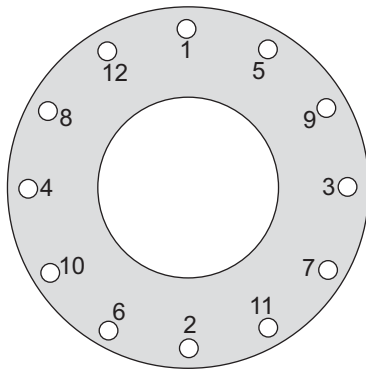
Tighten bolts diagonally / 12 bolts, spacing 30°
